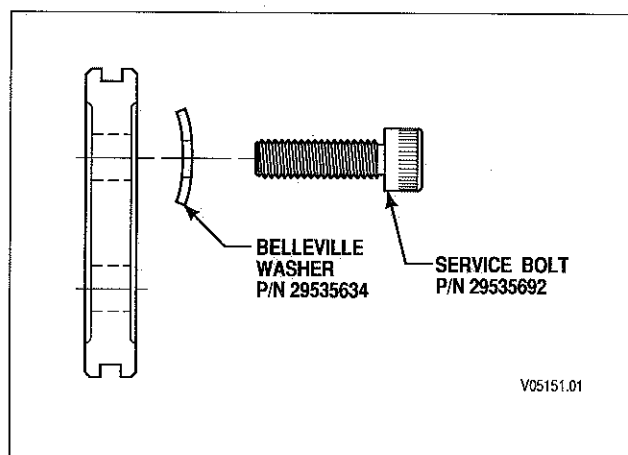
Output Flange and Oil Seal—3000 Product Family (Except 3700 SP and MD 3070PT)
